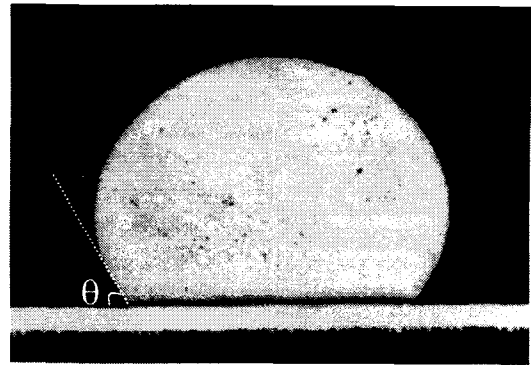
The shape of Sn-37Pb solder ball with 400um size after reflow.
